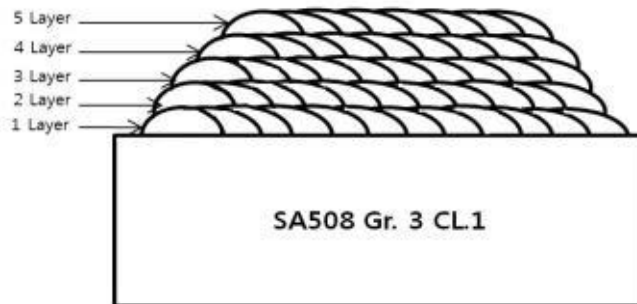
Low, medium, high weld heat input specimen.
